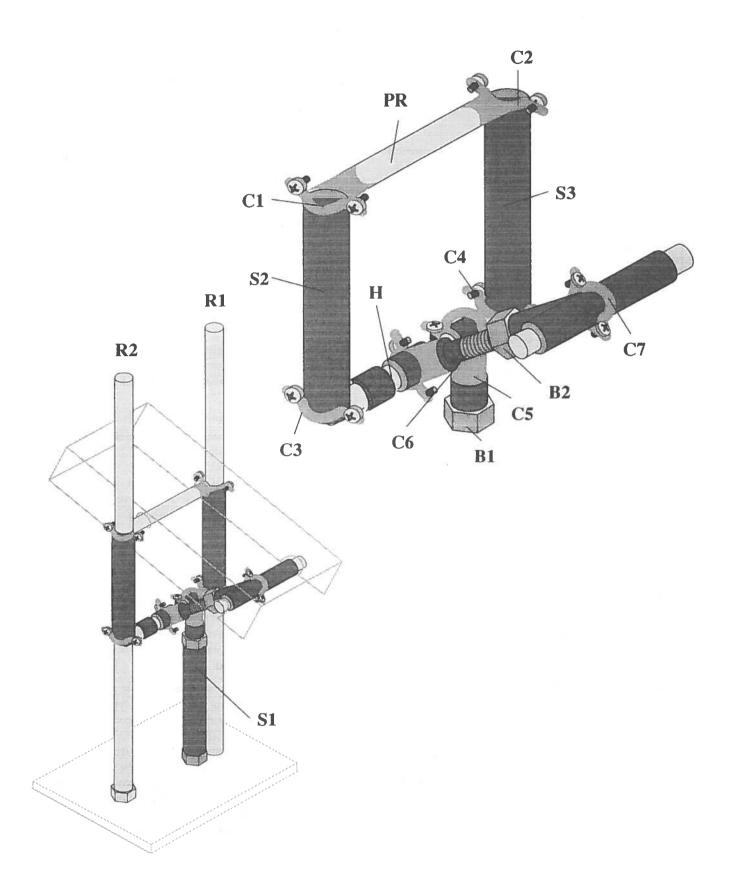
Modified stand and camera platform with magnified view of adjustment arrangements
